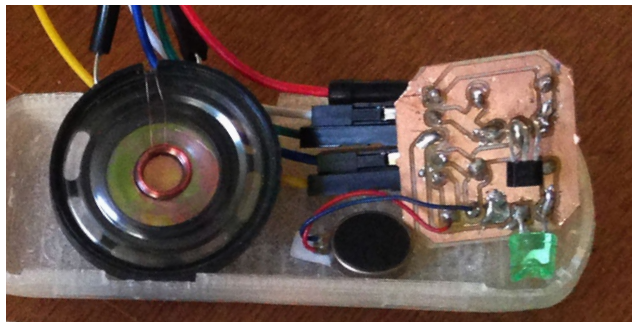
Interaction components embedded in a PCB which is made by CNC machine.
